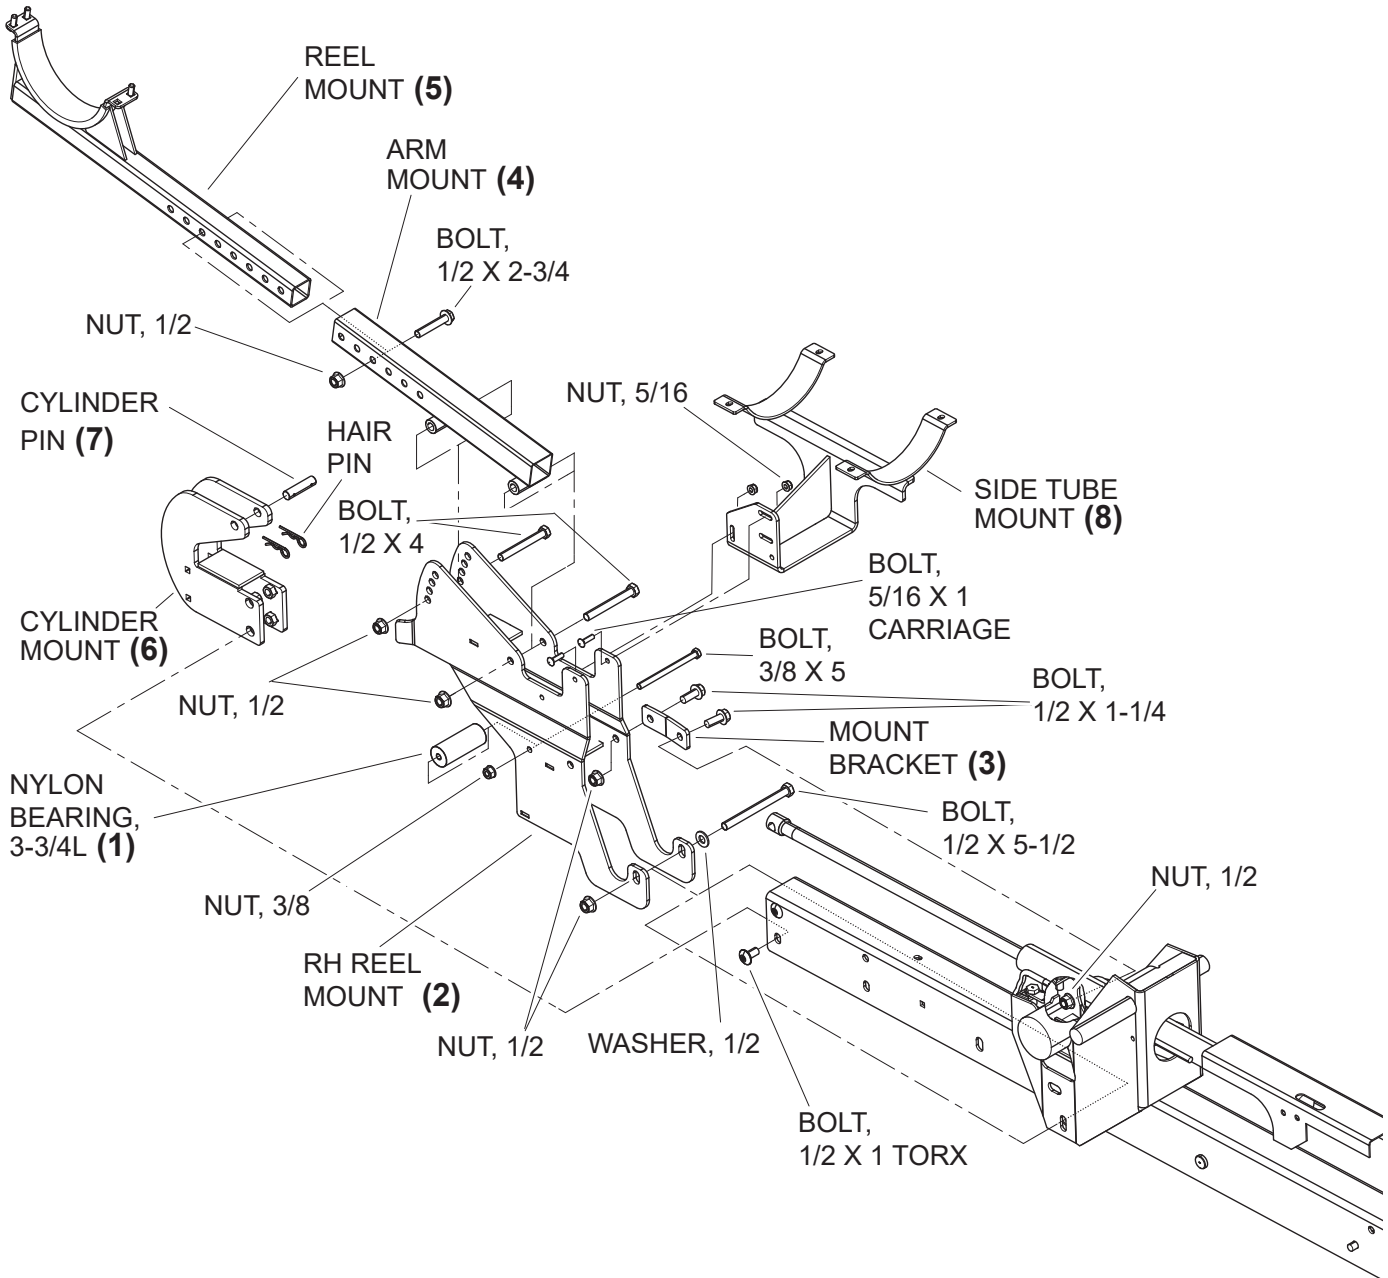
Right reel arm mount assembly (FD1 & FD75 headers)
